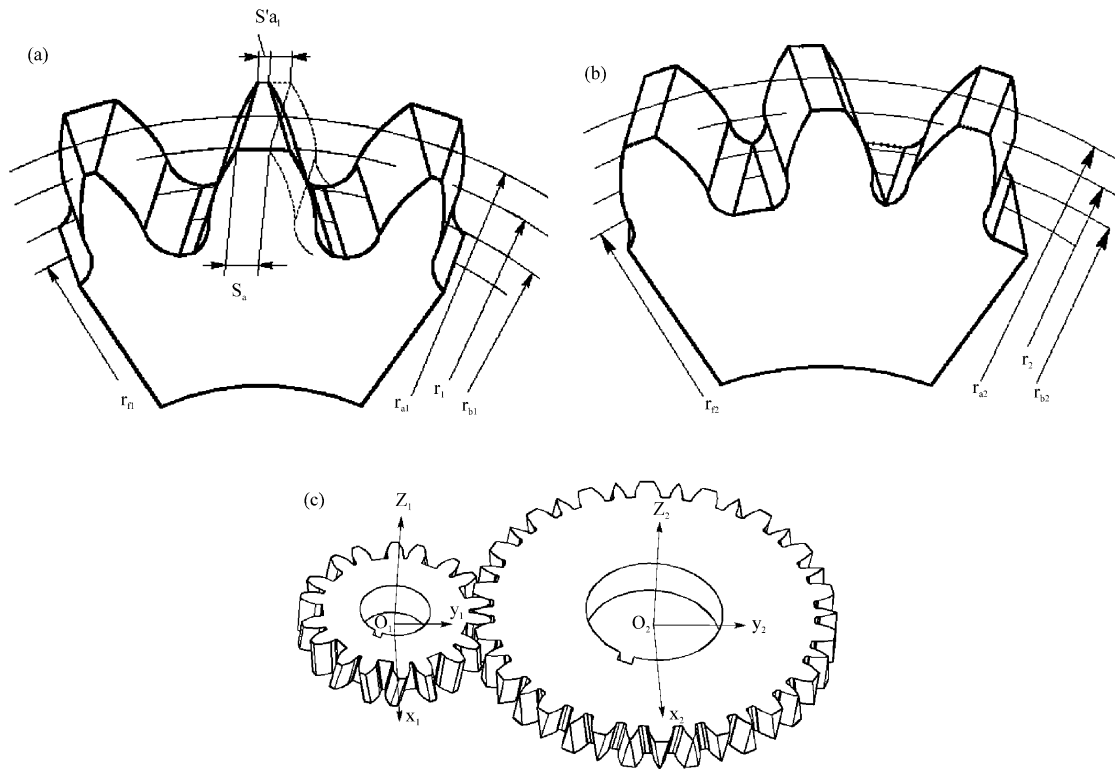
(a-c): Tooth shape of narrow herringbone gear (a) Tooth of wheel, (b) Tooth of pinion and (c) Model of the gear
